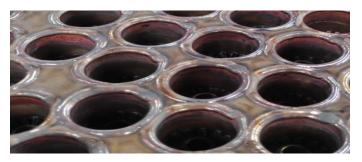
Weld seams made by defining 5 points for each pipe in the robotic system
